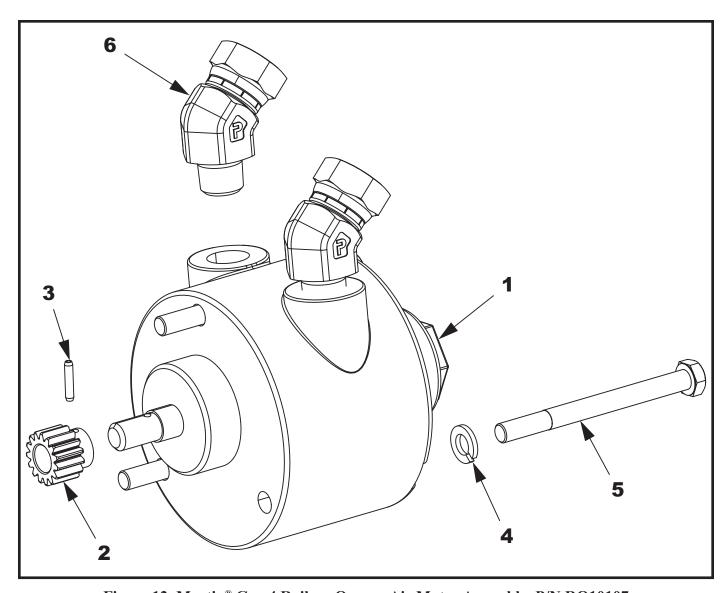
Martin® Gen 4 Railcar Opener Air Motor Assembly, P/N RO10107
